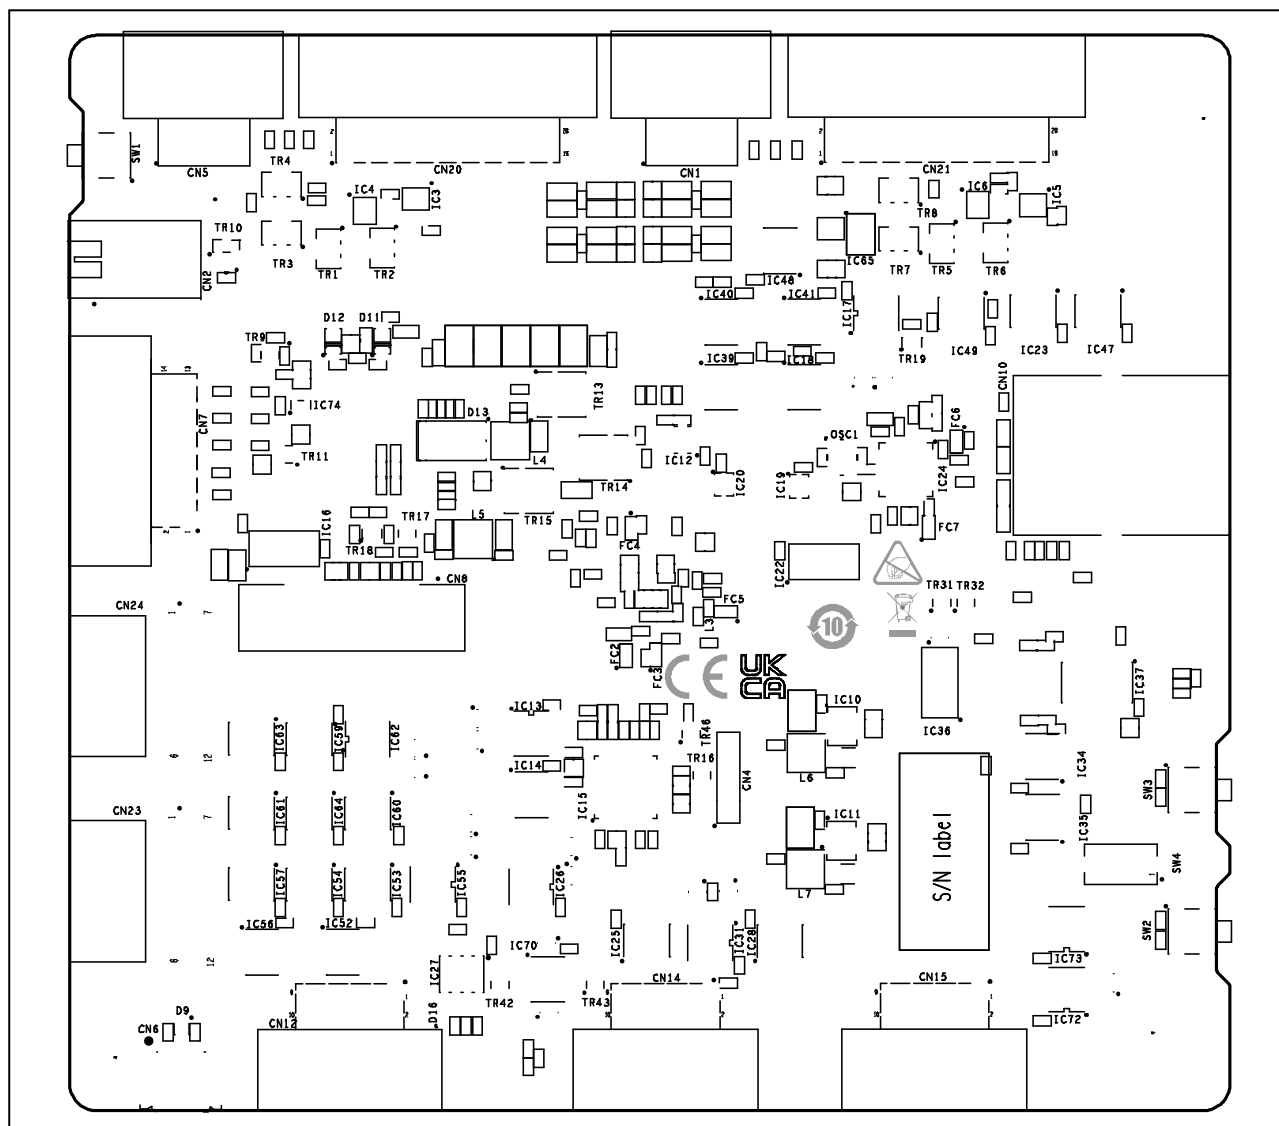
Placement of connectors on bottom side of the starter kit for board version D019567_06_V0300
